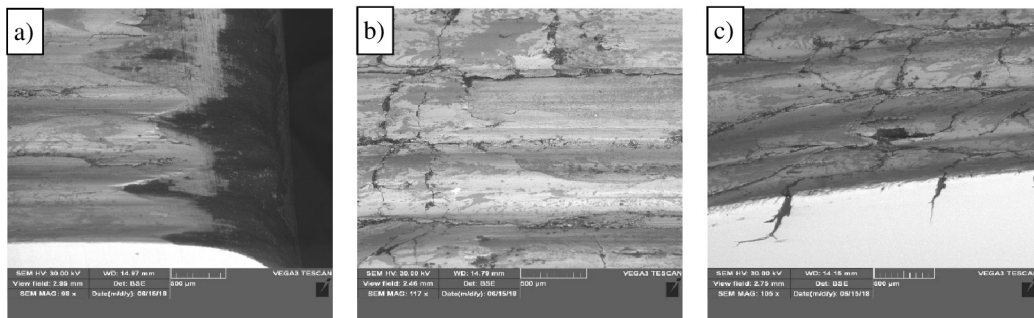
Analysis of zone I for a tool which has produced 1900 forgings
